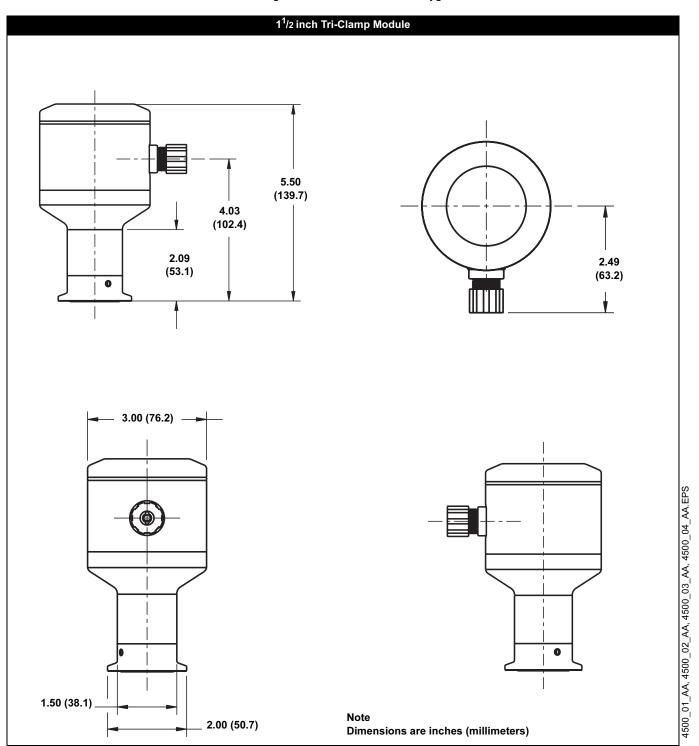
Dimensional Drawings for the Rosemount 4500 Hygienic Pressure Transmitter
